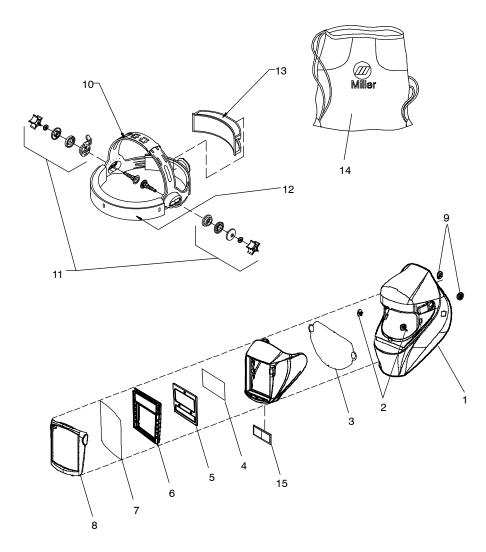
VSi Auto-Darkening Welding Helmet
